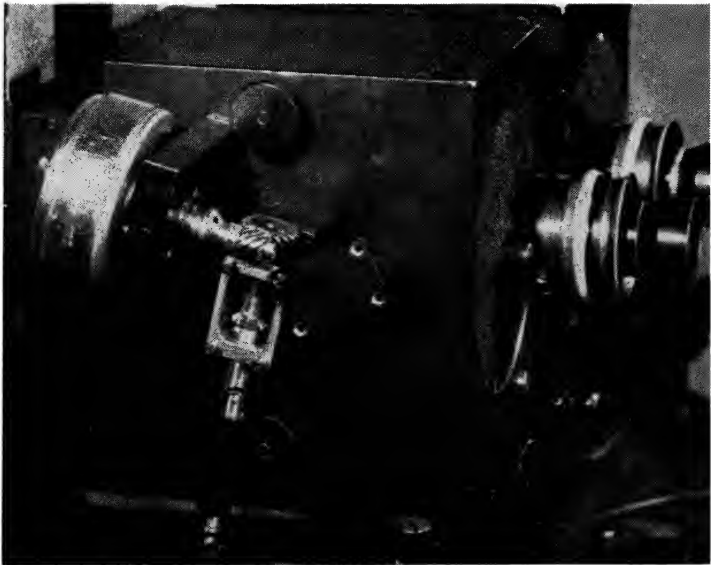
Drive mechanism: telescoping shaft, gearbox and tachometer.
